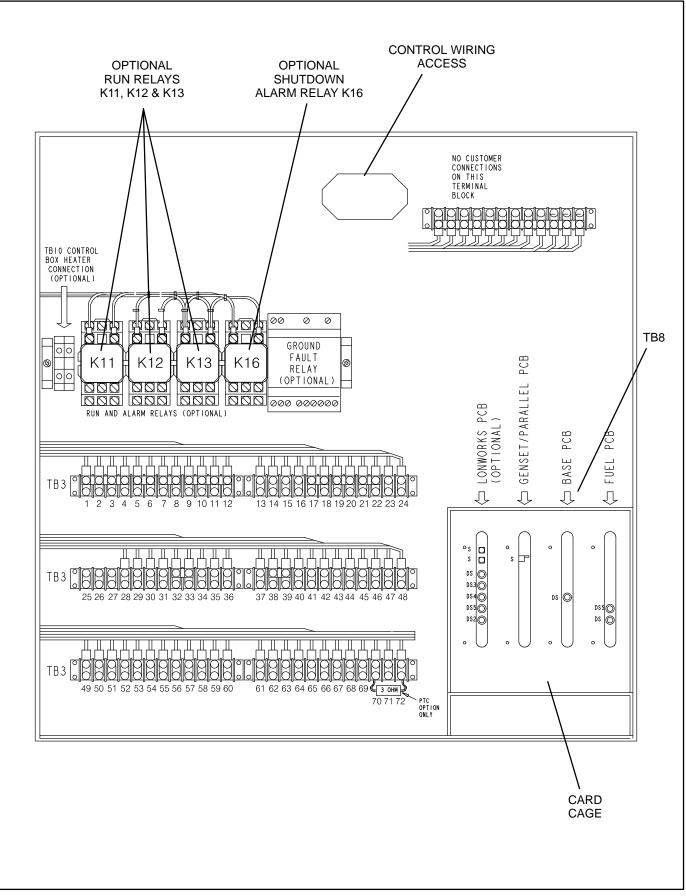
CONTROL BOX ASSEMBLY INTERIOR
